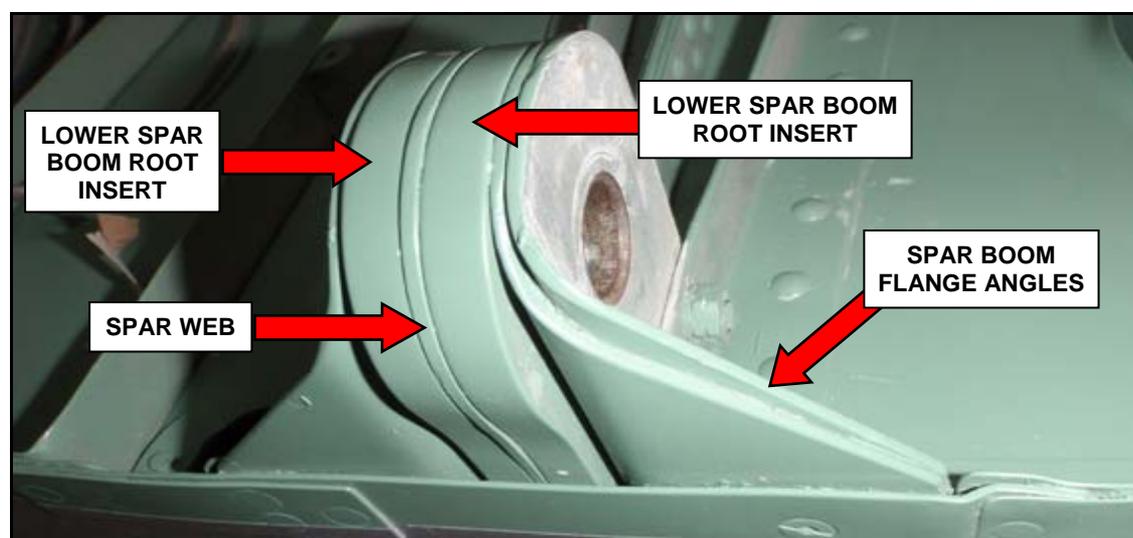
CHIPMUNK WING LOWER SPAR BOOM SHOWING ROOT INSERTS
